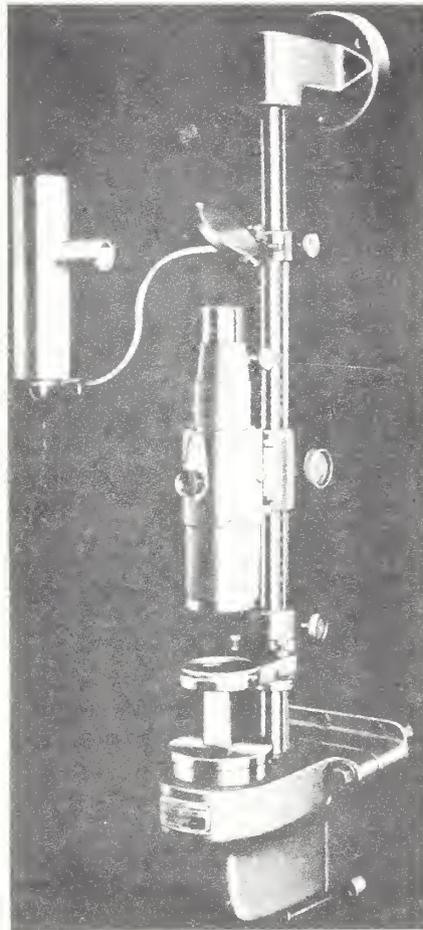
N. P. L. type interferometer for inspecting flatness and parallelism of gauge faces.
